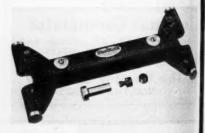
Sheffield Adjustable Plug Gage for sizes over 4 inches.
